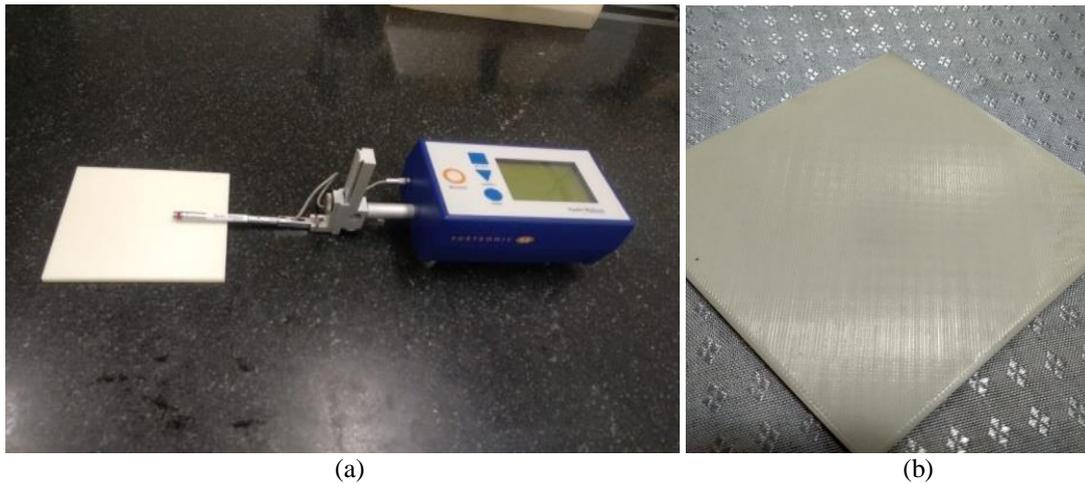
(a) Average roughness measurement, perpendicular to the printing direction; (b) 0.3 mm layer height sample in details, to check the direction of the filament deposited during the printing.
